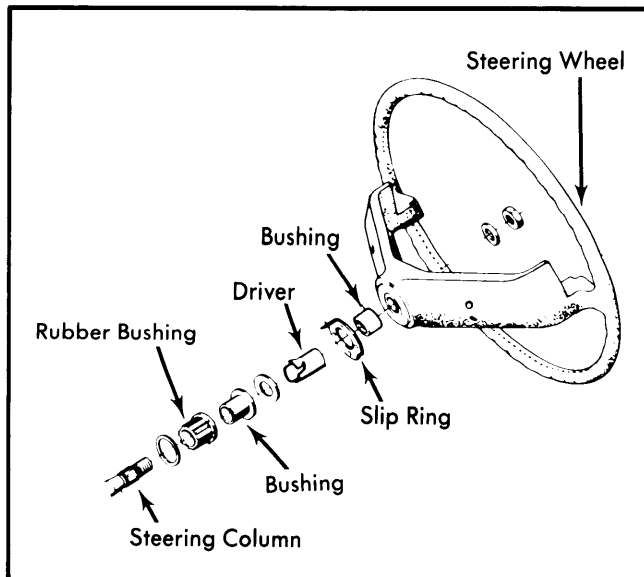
Exploded View of Saab Steering Wheel Except EMS Models
